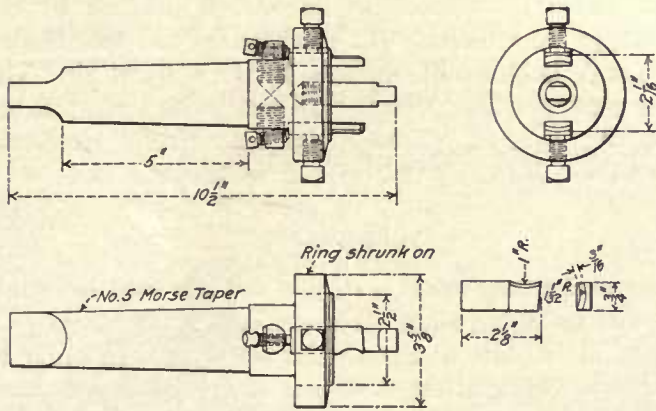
Tool for Cutting Tube-Sheet Holes.
